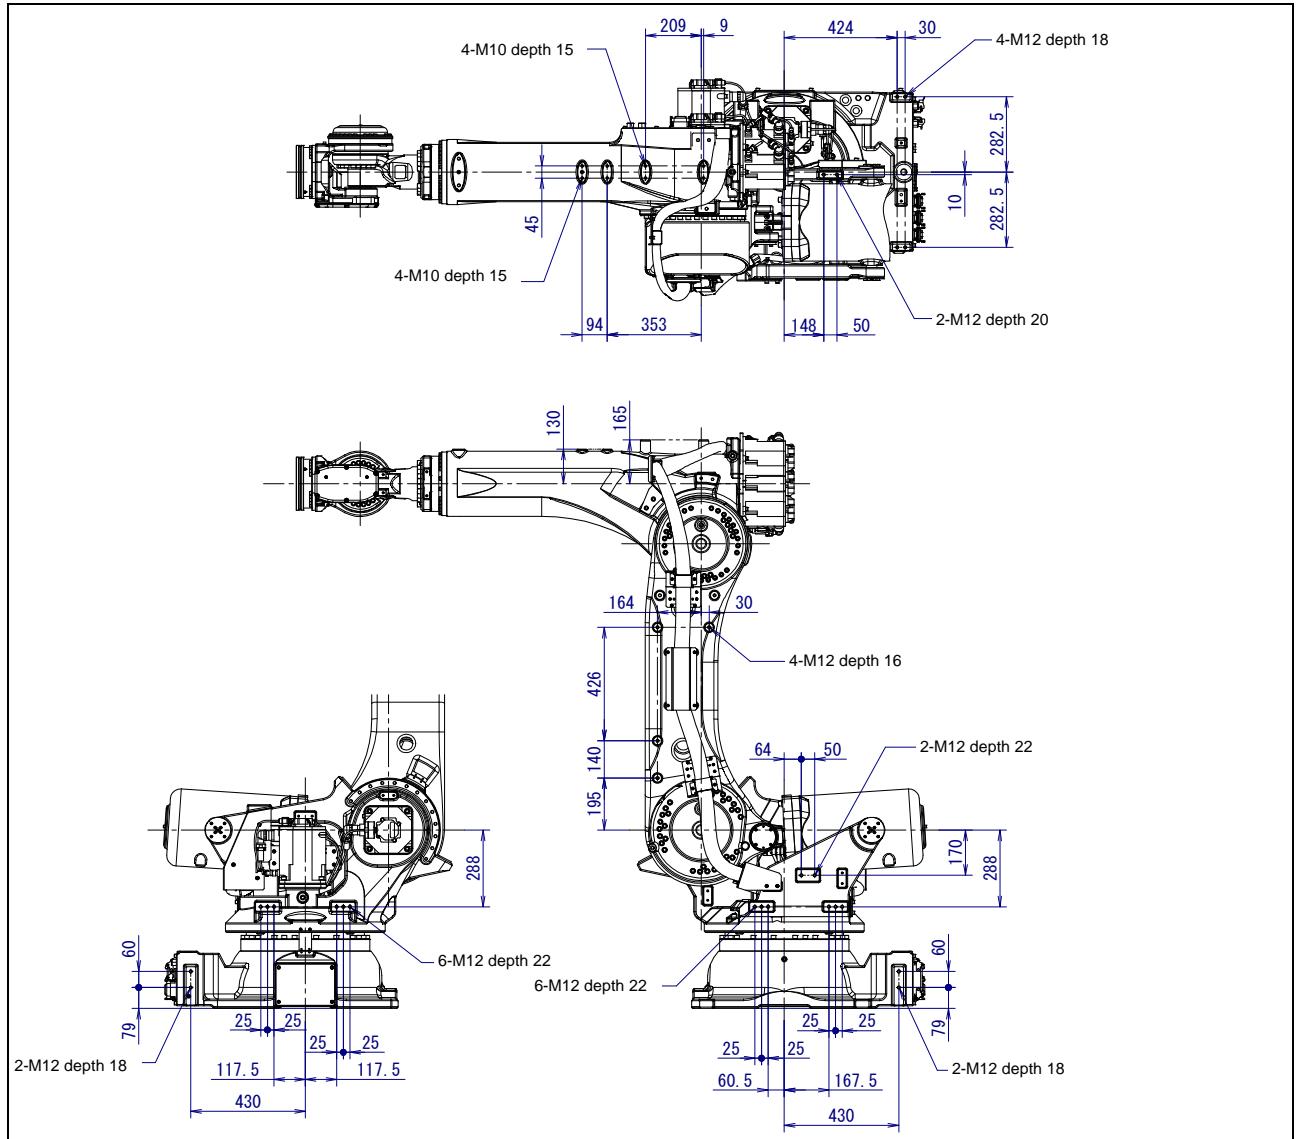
(d) Equipment mounting faces (R-2000iC/270F/210L)
